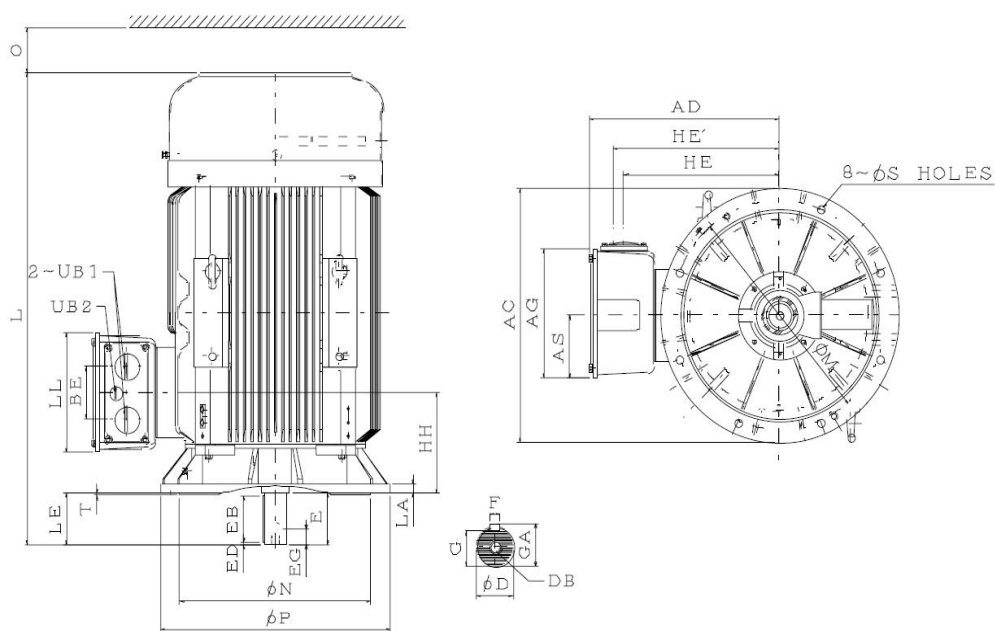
Outline drawing of cast iron design, mounting V1; frame size 315S – 315M
